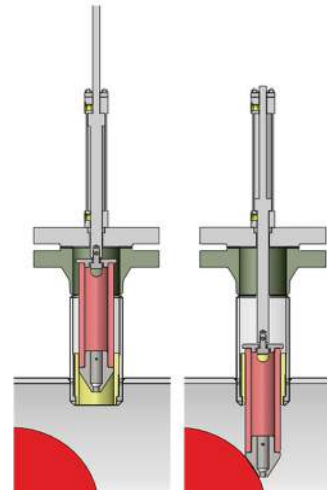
Pin assembly retracted (left) and extended (right) to retain pig
